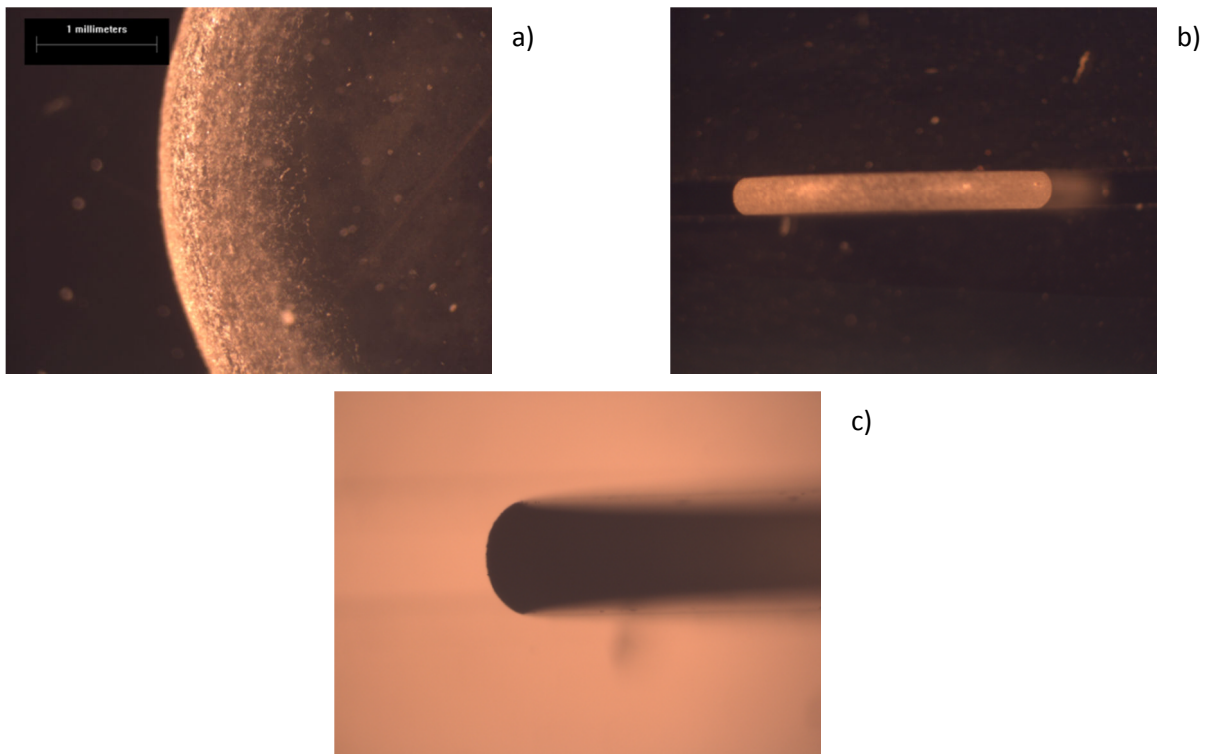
Original N-BK7 glass (without any coating) after molding a) top view, b) side view and c) side view at higher magnification.
